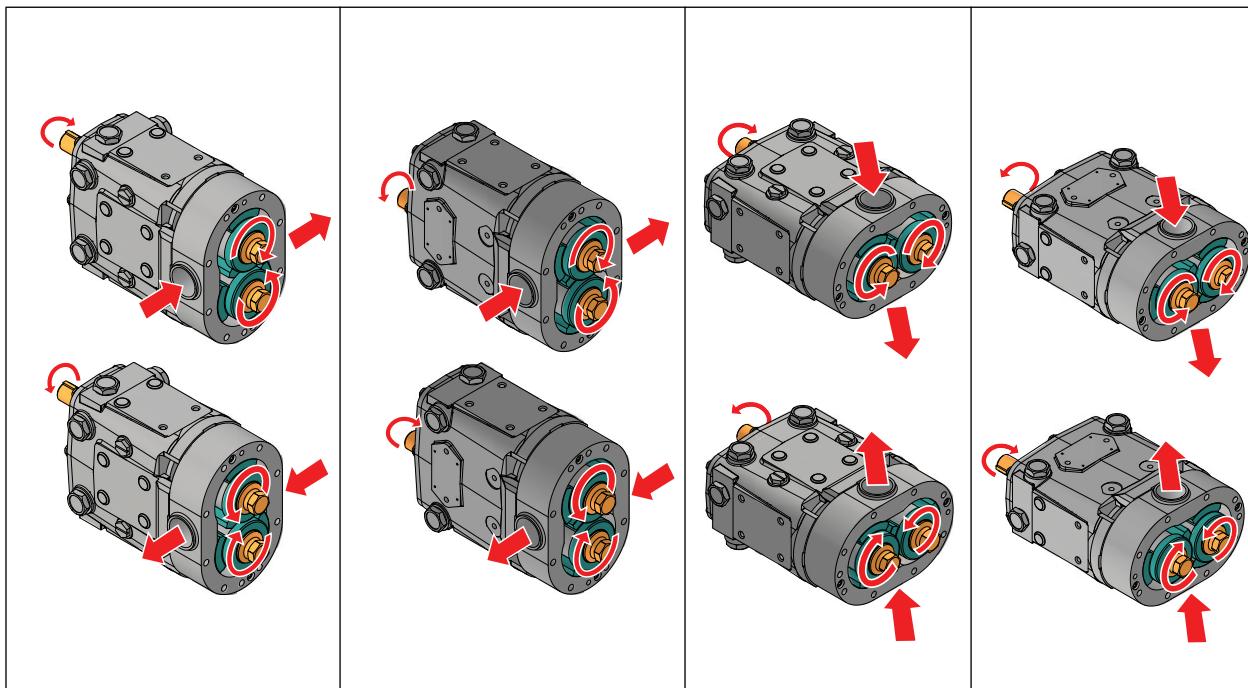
Upper Shaft Drive Flow, Lower Shaft Drive Flow and Vertical Porting Flow and Pump Rotation (Liquid End Shown)
